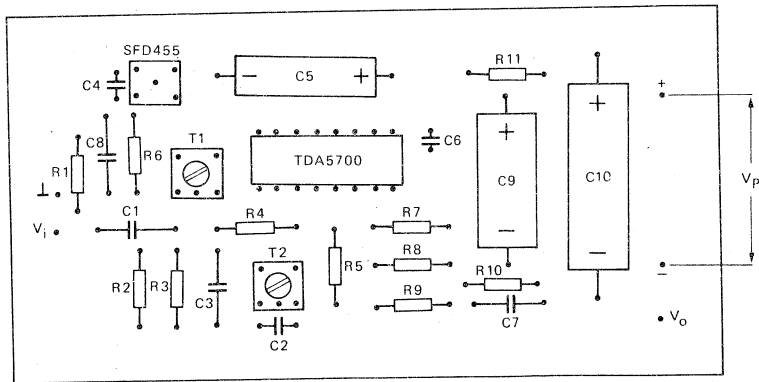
Component side of printed-circuit board (test circuit Fig. 3).
